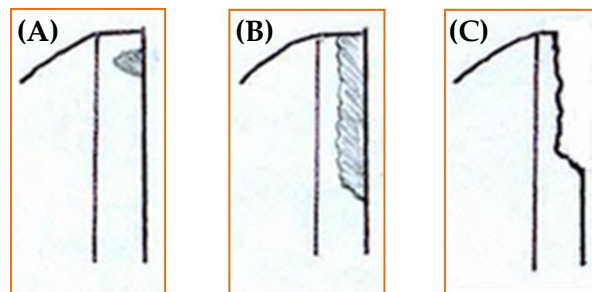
An end mill wear pattern: Stair-formed face wear ( $KT2$ ) on end-mill [17]
